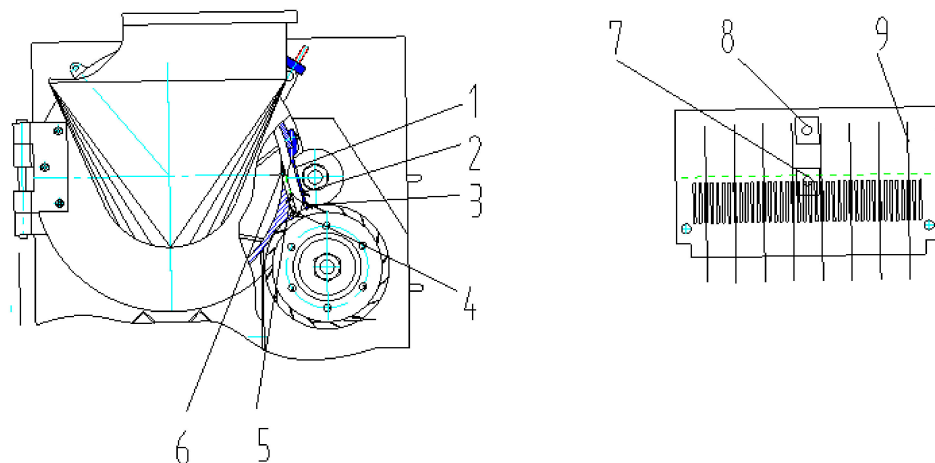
Diagram of speed sensor layout. 1. Upper guide plate; 2. receiver 1; 3. receiver 2; 4. transmission sensor 2; 5. transmission sensor 1; 6. slicing tool; 7. transmission sensor 1 position; 8. transmission sensor 2 position; 9. disc cutting tools distributed at various intervals.
